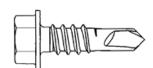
#12-14 HEX WASHER HEAD TYPE 3 SCREW
